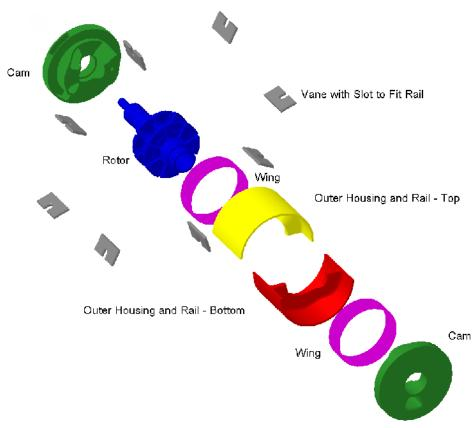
Components of ATI "Winged Rotor" axial-vane mechanism.
